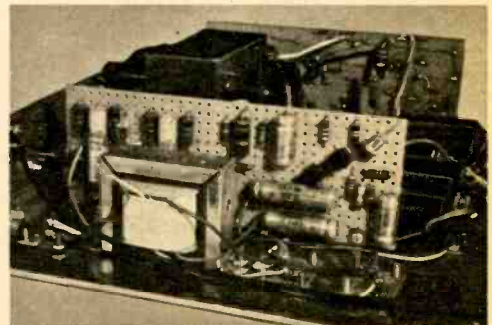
Left-channel board. Driver transformer T2 (foreground) in author's model is unshielded. Transformer in parts kit will be in metal case.
